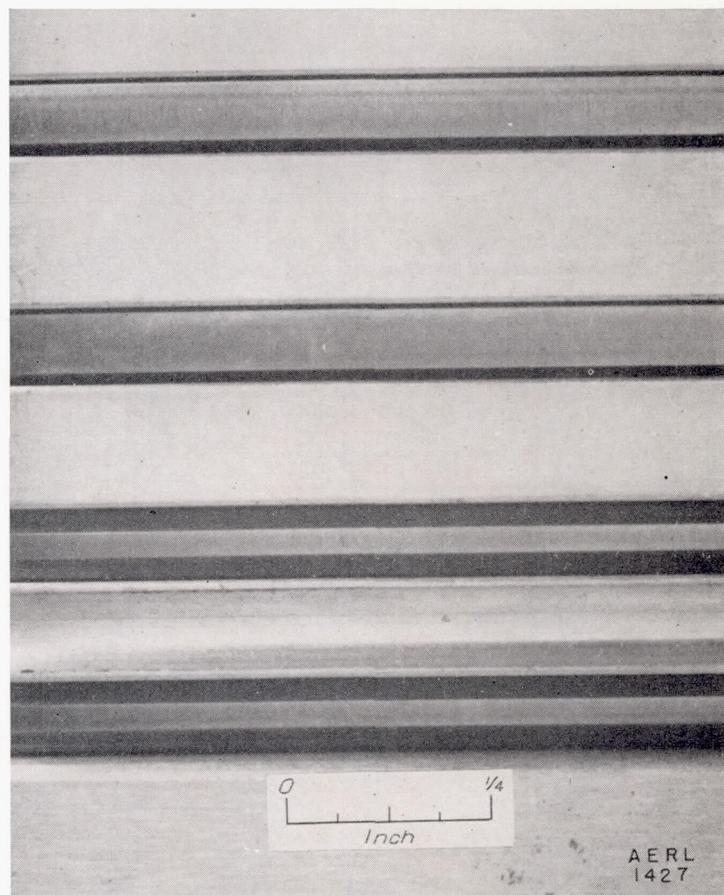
Piston assembly after high-output runs. High-pressure oil rings. Major thrust face. Reference run 31.
